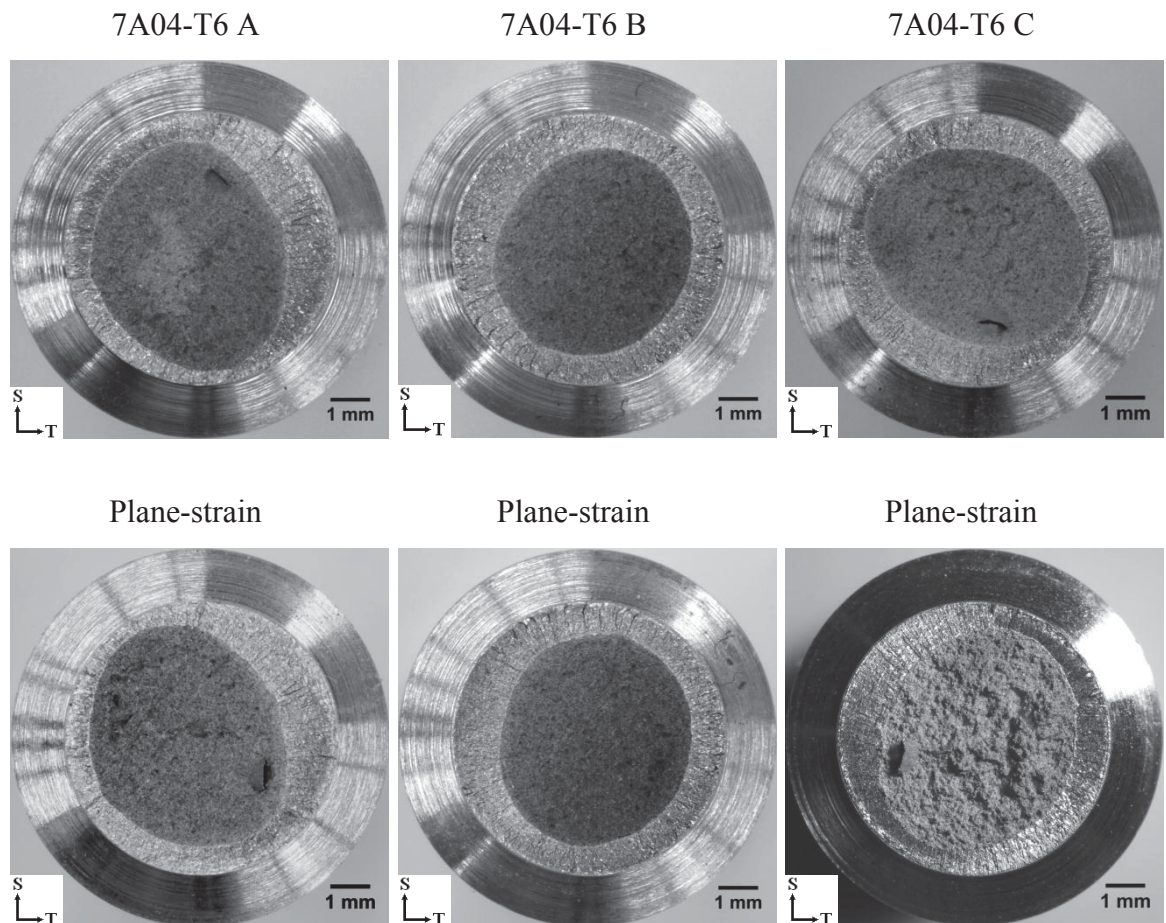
Circumferential notch tension precrack fracture surface for 7A04-T6 alloys. The top and bottom fractographs for each column are the matching fracture halves for each specimen. The letters A, B and C are used in this section to designate the test specimens.
